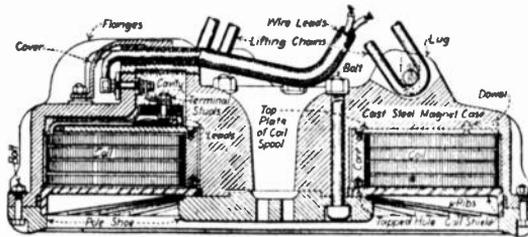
Cross-Sectional View of Electromagnet Used for Carrying Heavy Loads.
